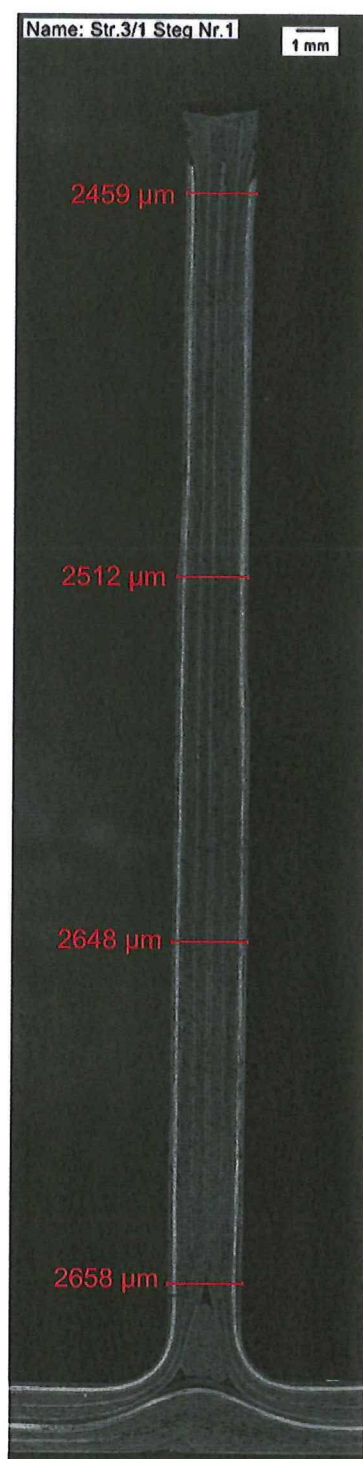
Cross section of panel 1 stringer 3 skin
